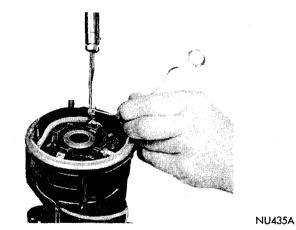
Soldering Solenoid Lead to Brush Terminal
